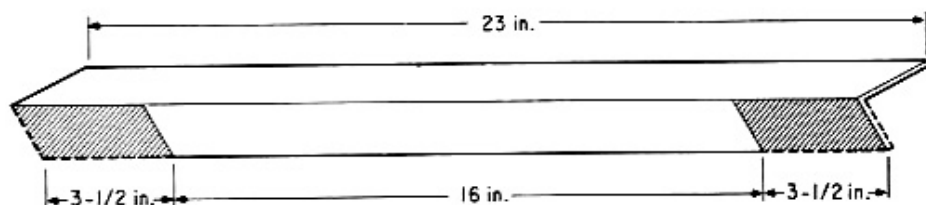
Aluminum side of lower triangle. Cut out shaded pieces.
